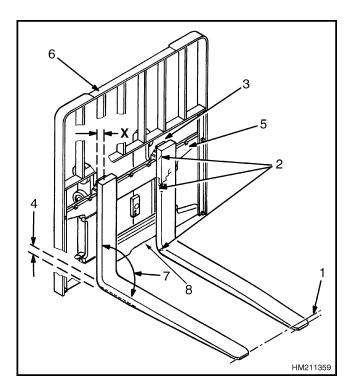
Fork Removal, Lift Trucks Equipped With Fork Positioner Attachment
